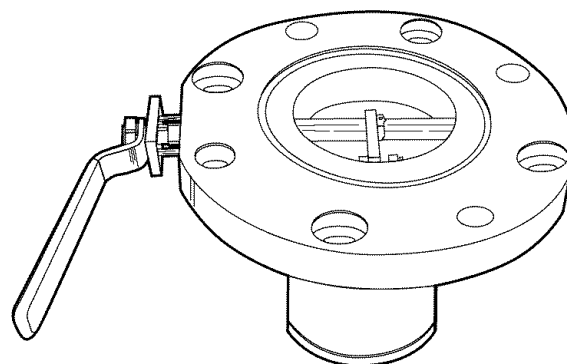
A — Suction Service Valve Locking Device, Closed and Unlocked
